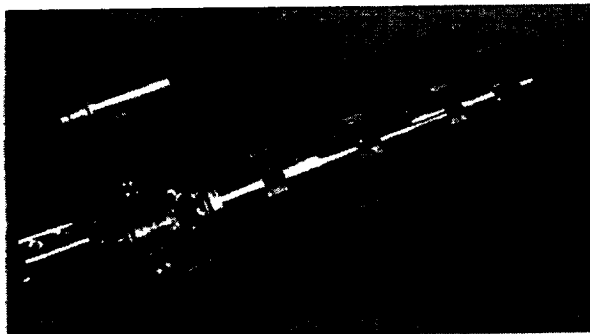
Electron beam welded balance with air flow through system ($\varnothing 192$ mm).
